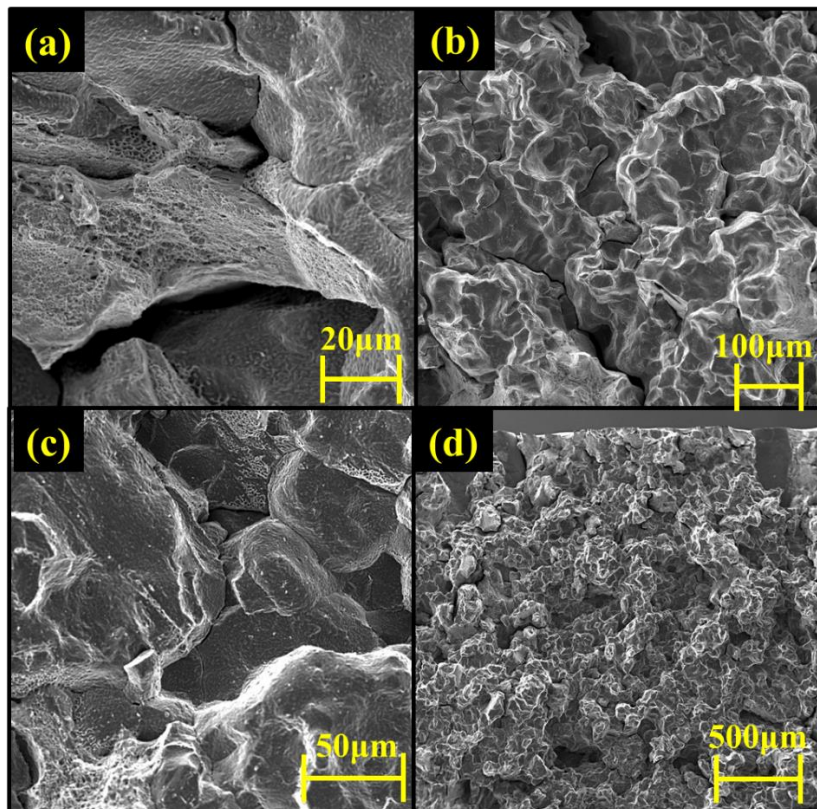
SEM fractography of SLM+HIP+EBW sample 7A (213.2 J/mm) indicating brittle surface. This sample was fractured in the weld HAZ.
